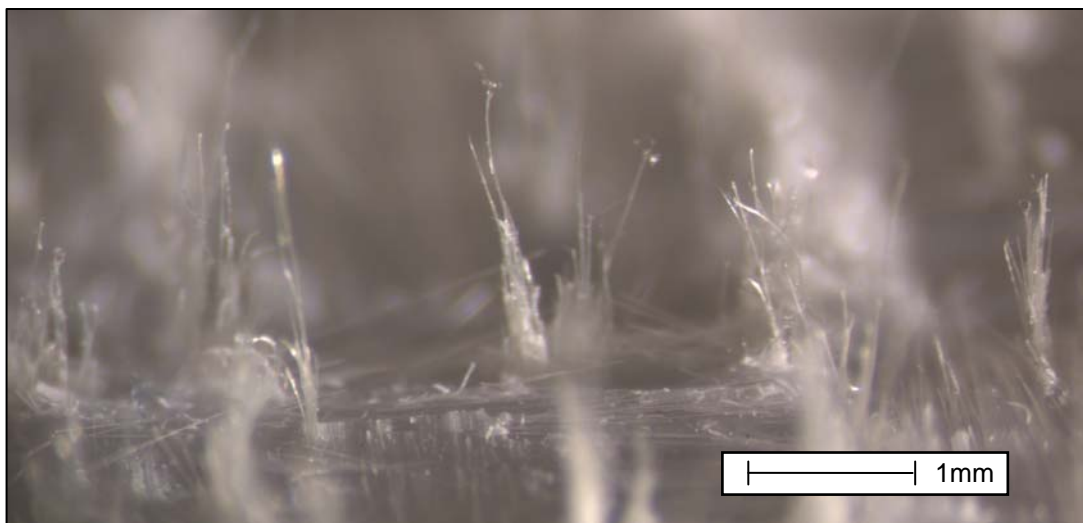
Optical image of post-mortem fracture surface of a DCB specimen.
